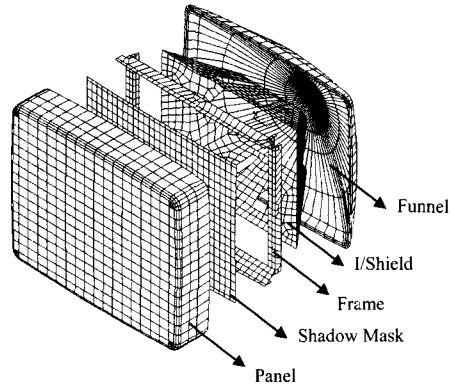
The finite element model of the shadow mask assembly (exploded view)
